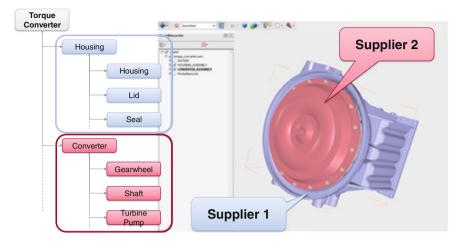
Assembly with parts highlighted which are designed by suppliers
